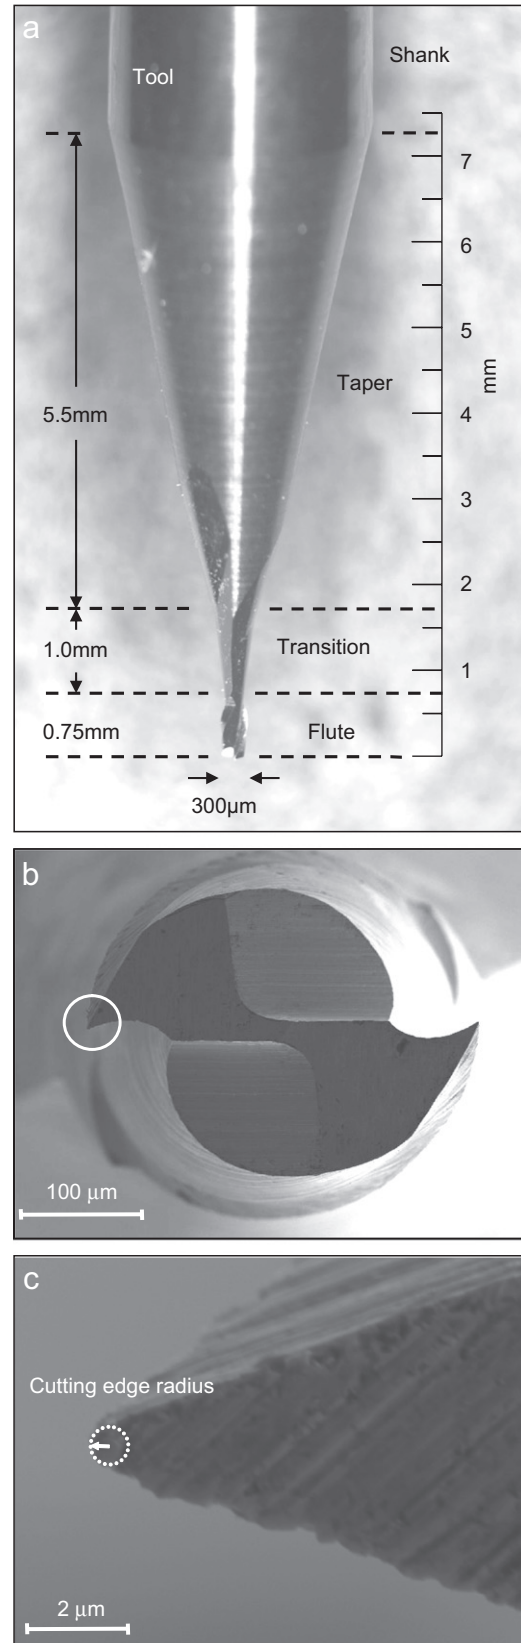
Micro end mill tool dimensions: (a) optical image showing all sections of the tool, (b) SEM image of the cutting end of the end mill, and (c) SEM image of the cutting tip of the end mill.
